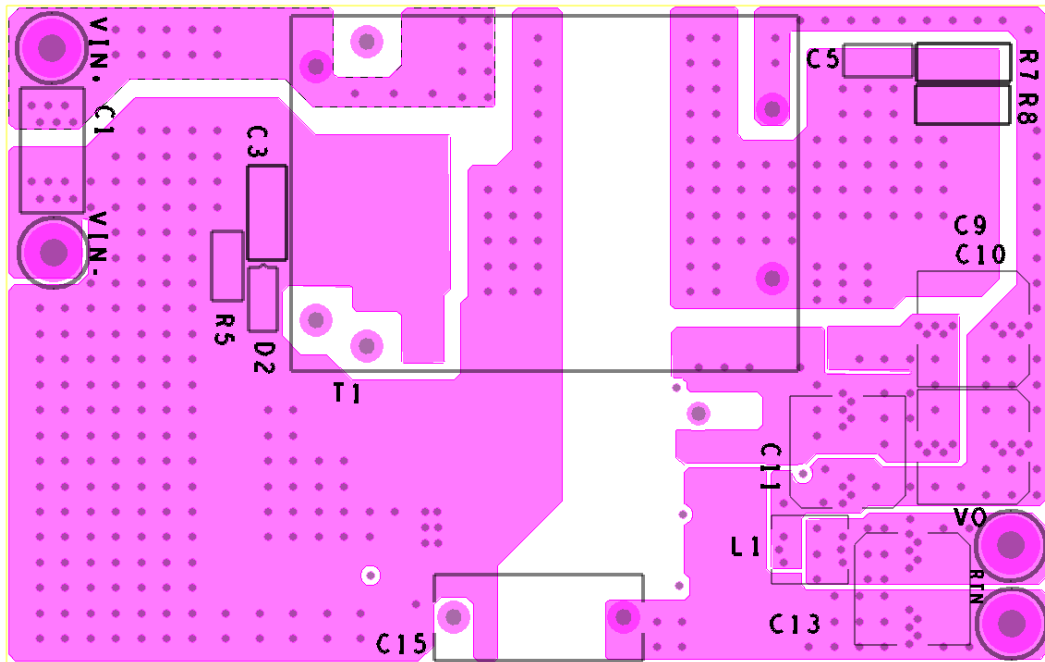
Printed Circuit Board Layout (Internal layer 2).
